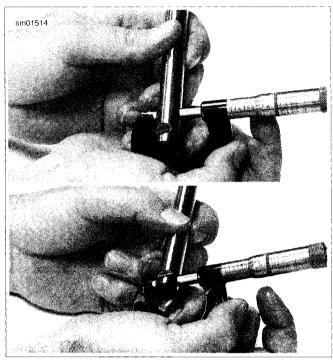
Measuring Rocker Arm Shaft Diameter at Bushing Position (top) and Cover Position (bottom)
